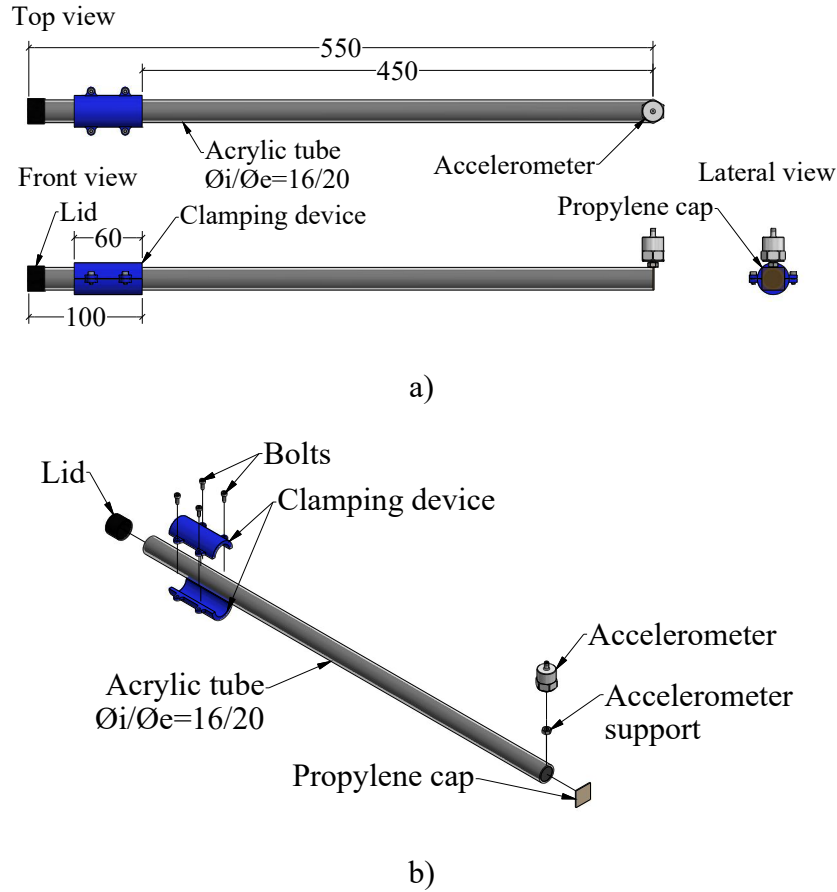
Experimental setup for EMM-ARM testing of cement paste: a) Scheme; b) 3D exploded view [units: mm].
